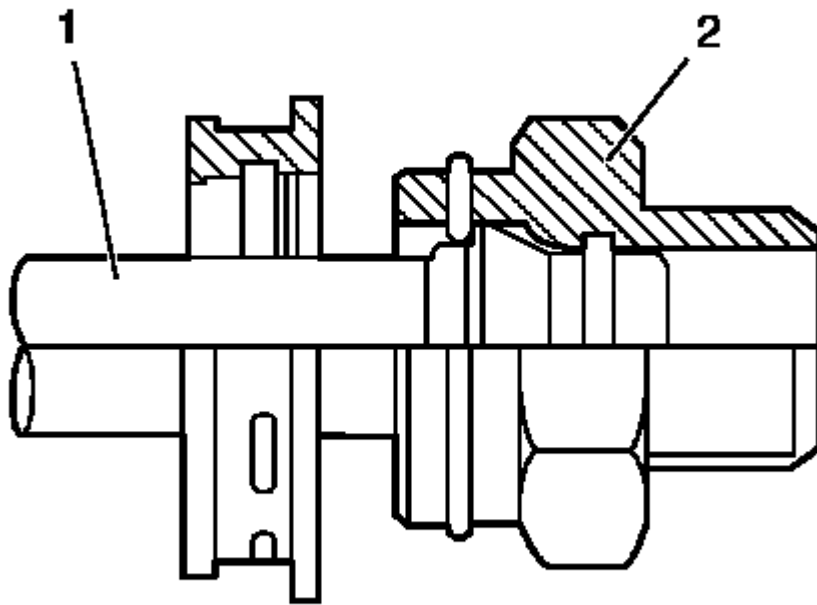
Cutaway View Of Automatic Transmission Oil Cooler Fitting
